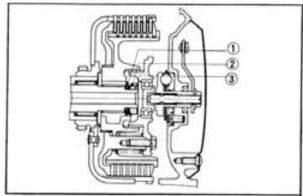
① Spring washer ③ Lock nut ② Lock washer
